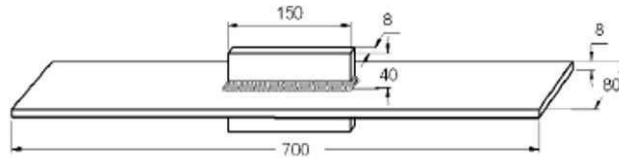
Welded specimen for fatigue testing of 350 and 700 MPa yield strength steel welded elements [13]
